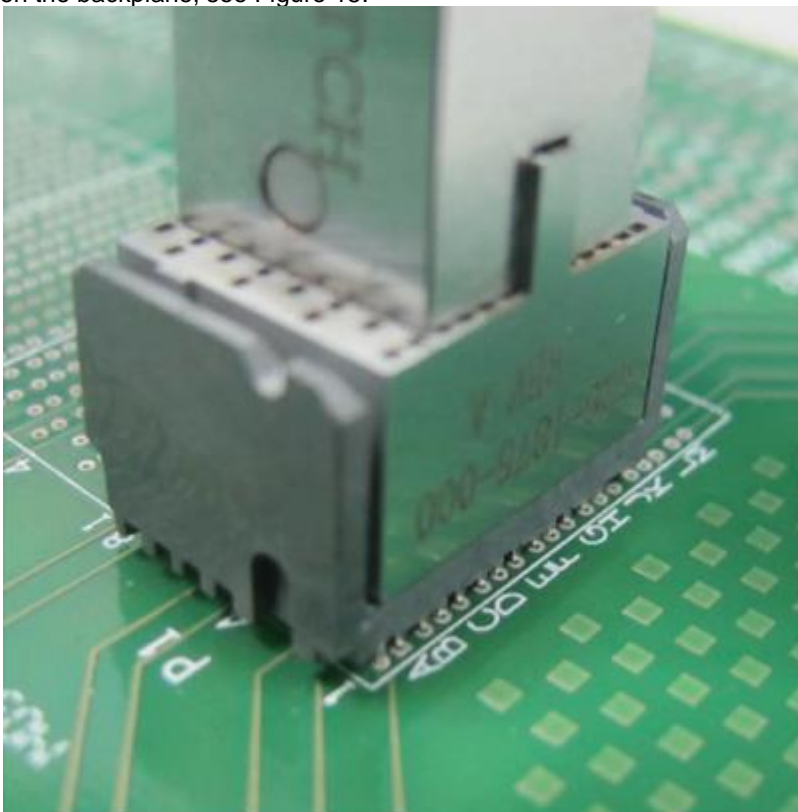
Ensure the cavities in the seating head match up to the blades on the backplane module.
